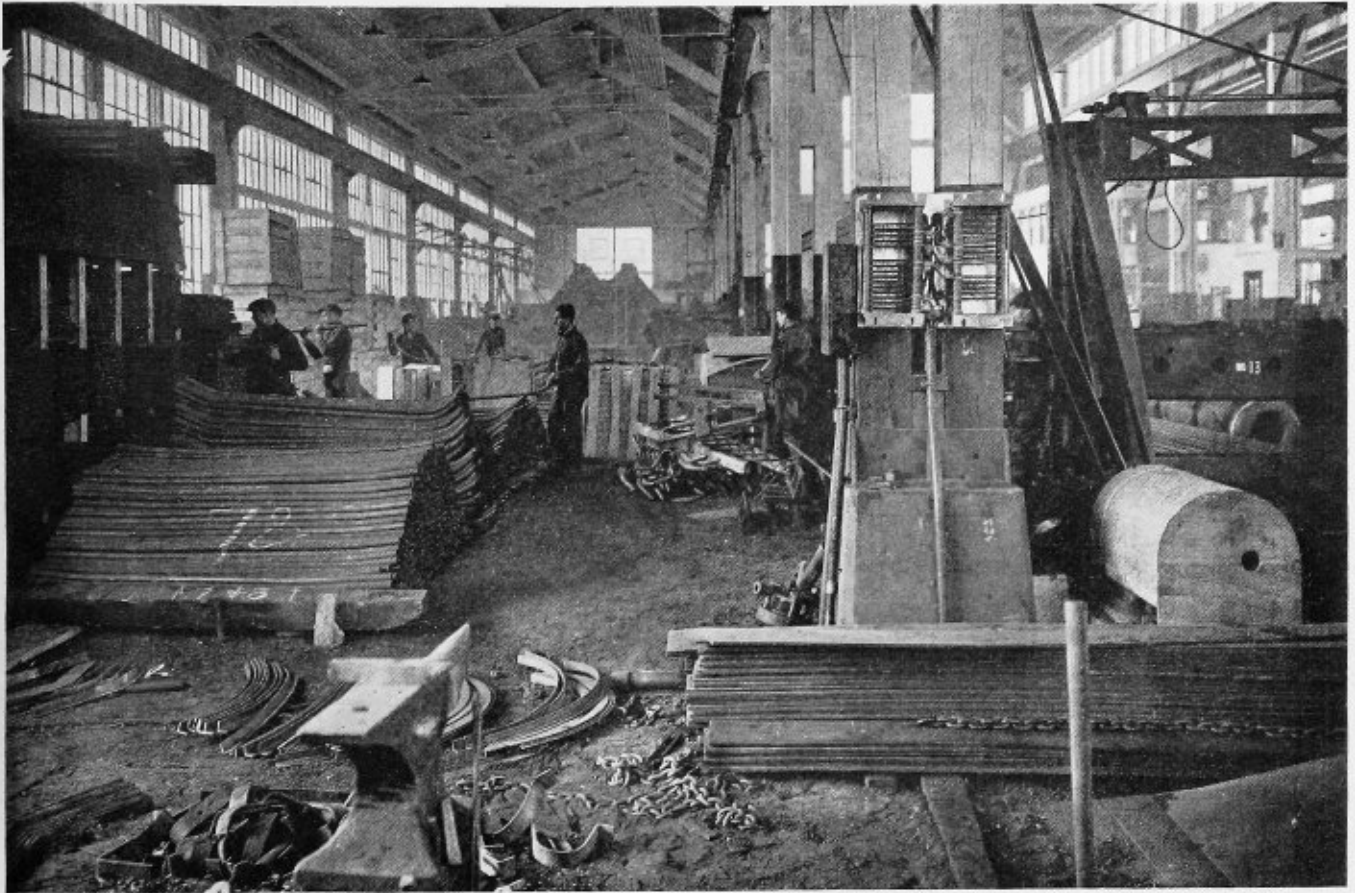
Tube Department Located in East Bay Where Tube-Bending Machine and Polishing Equipment Are Located
